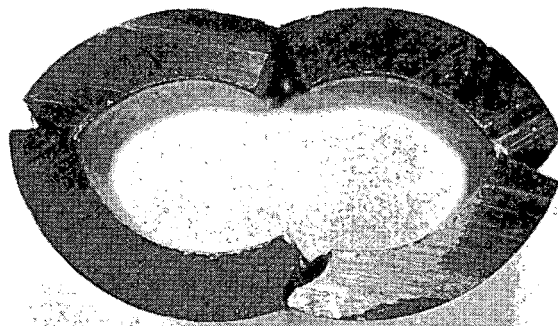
T-111 alloy tubing (0.375-in. by 0.062-in. wall) after cutting with water-cooled alumina abrasive cutoff wheel.
